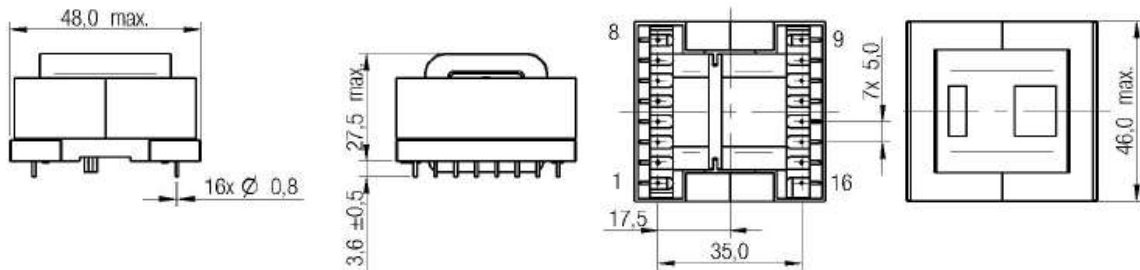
Wurth 760895731 Mechanical Drawing (dimensions in mm)
